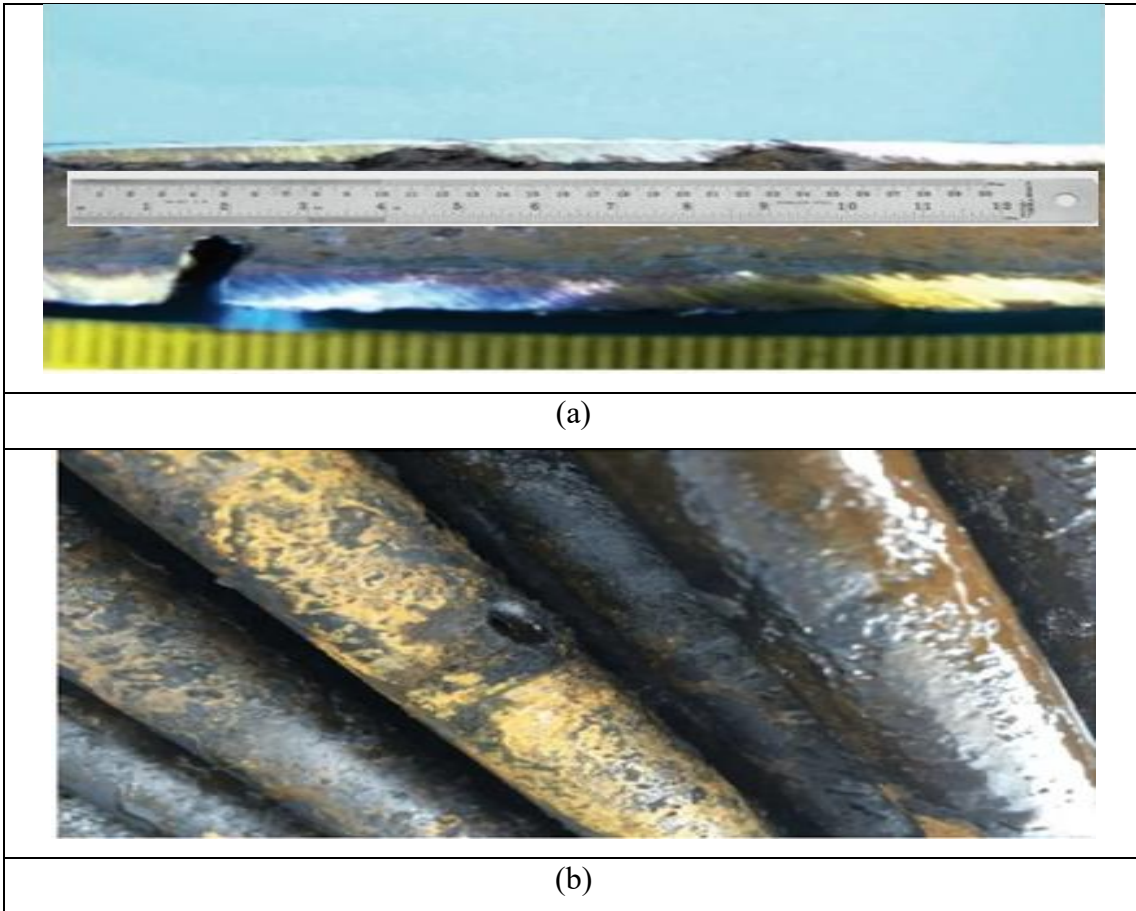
(a) X-section of tubing damage via pitting (b) Uniform corrosion
